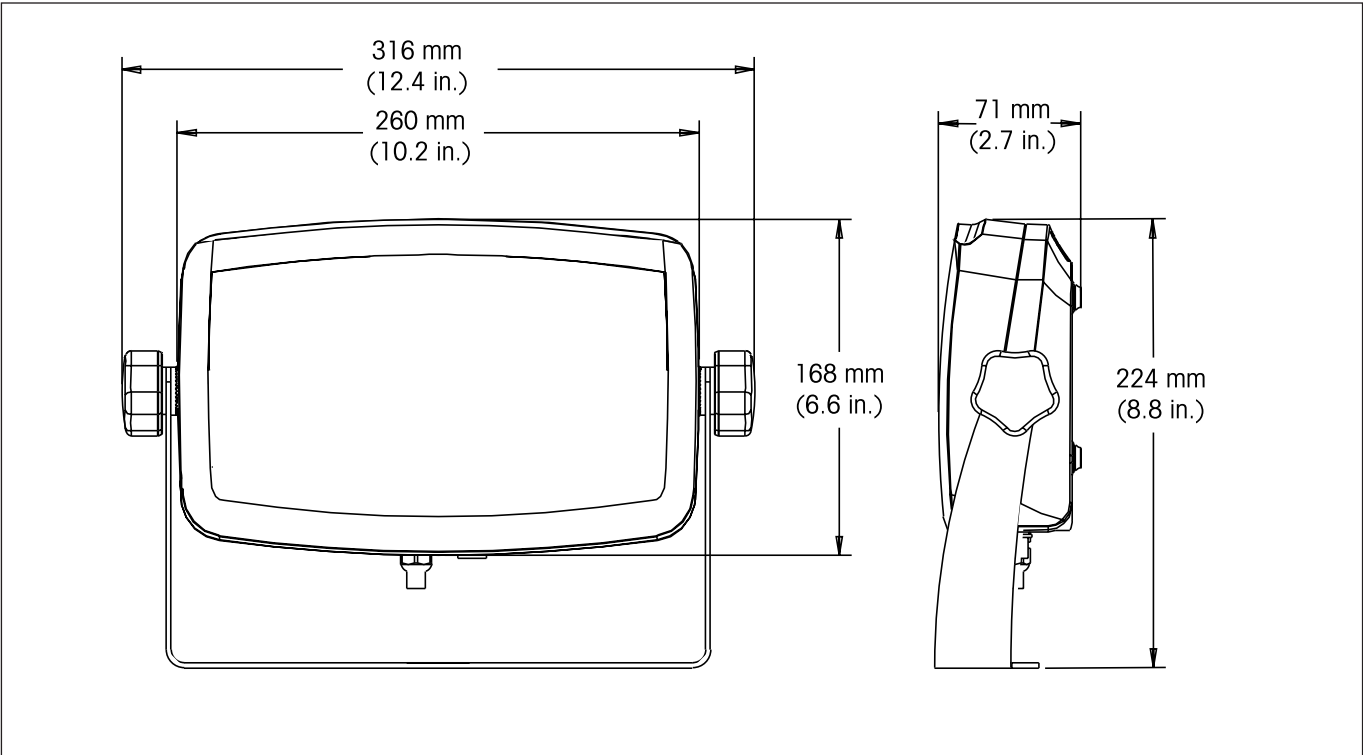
T51P Indicator Overall Dimensions with Mounting Bracket.
